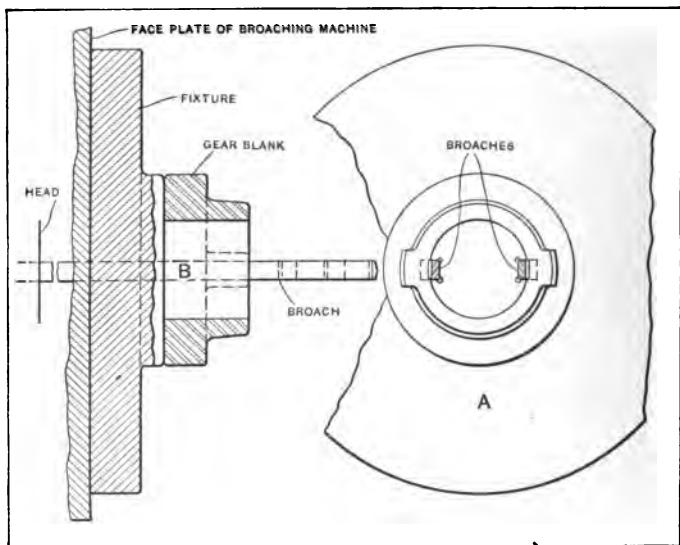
Fixture used for holding Gear Blanks while broaching Two Keyways in One Stroke of Machine
